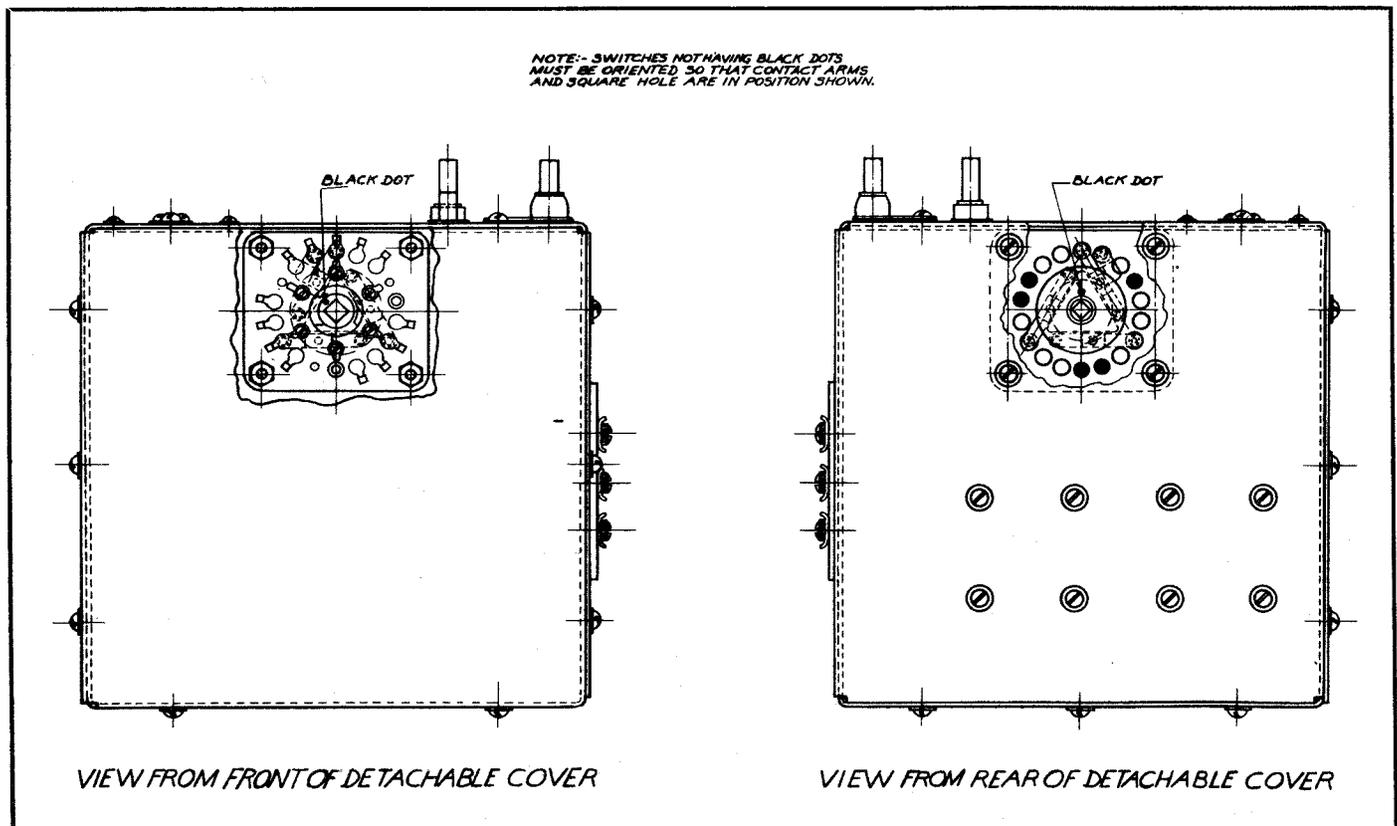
RBB/RBC, R-F Box Removal—Board Switch in No. 2 Position
